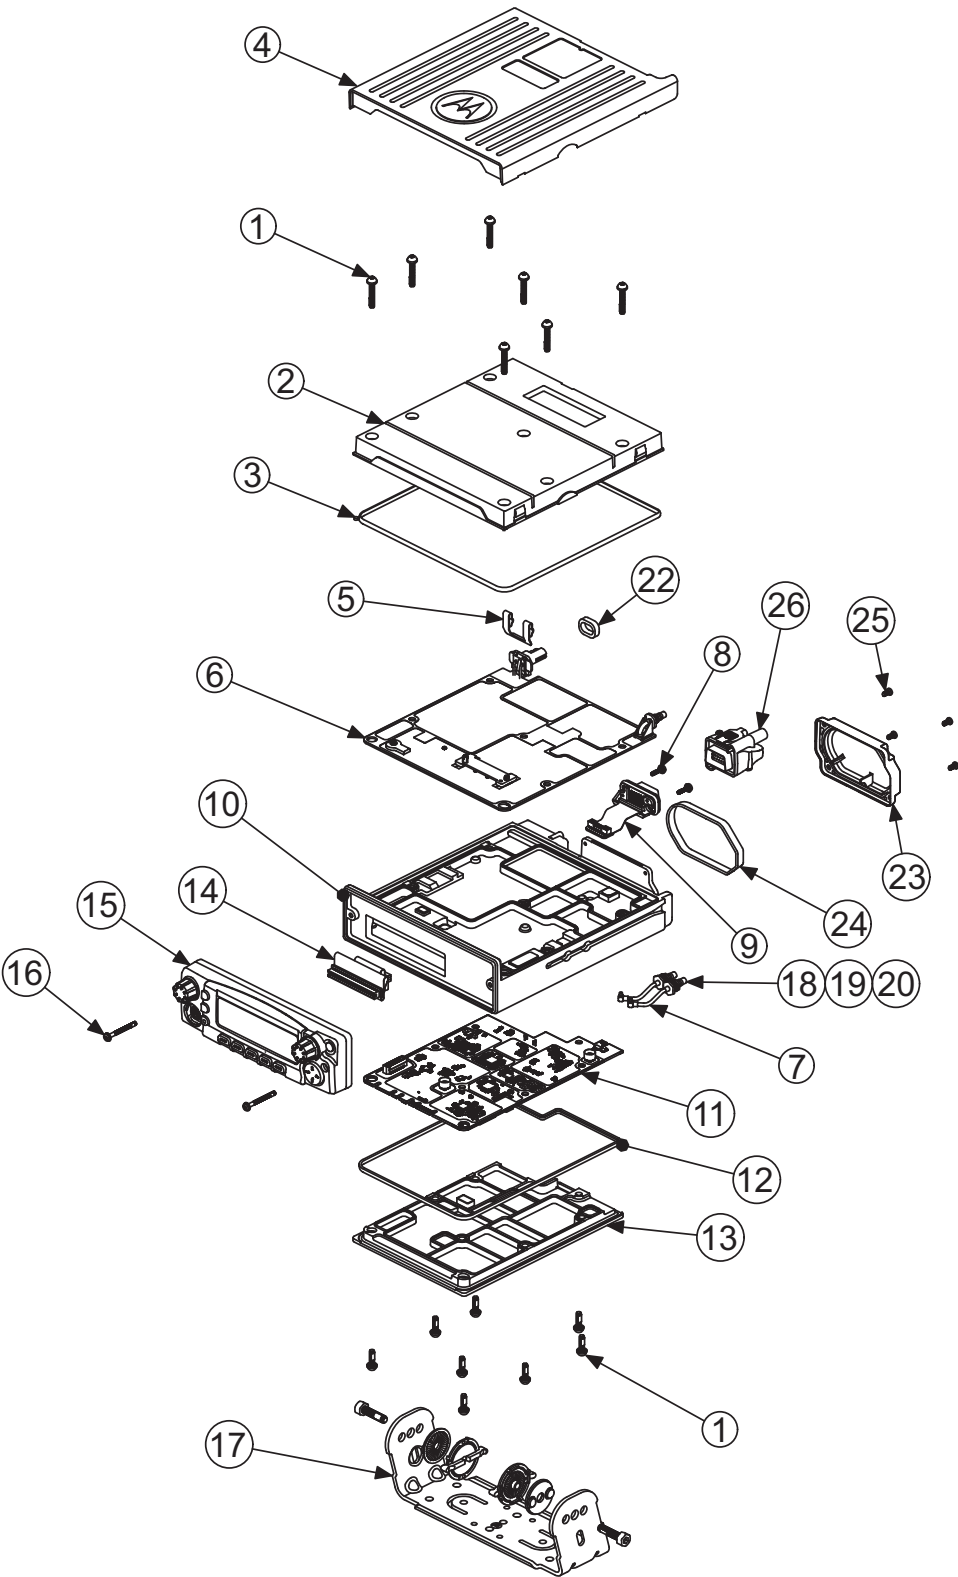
APX 8500 O5 Dash Mount Radio Exploded View
